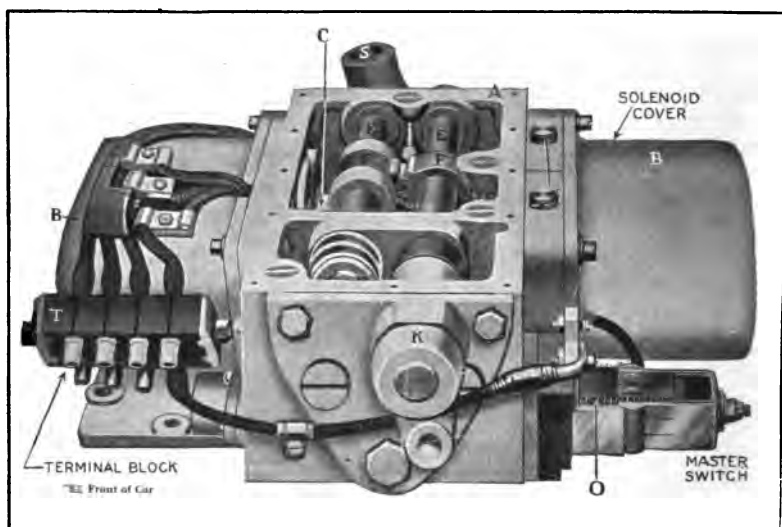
The Vulcan Electric Gear Shifting Element Designed for Attachment to Standard Automobile Change Speed Gearing.
